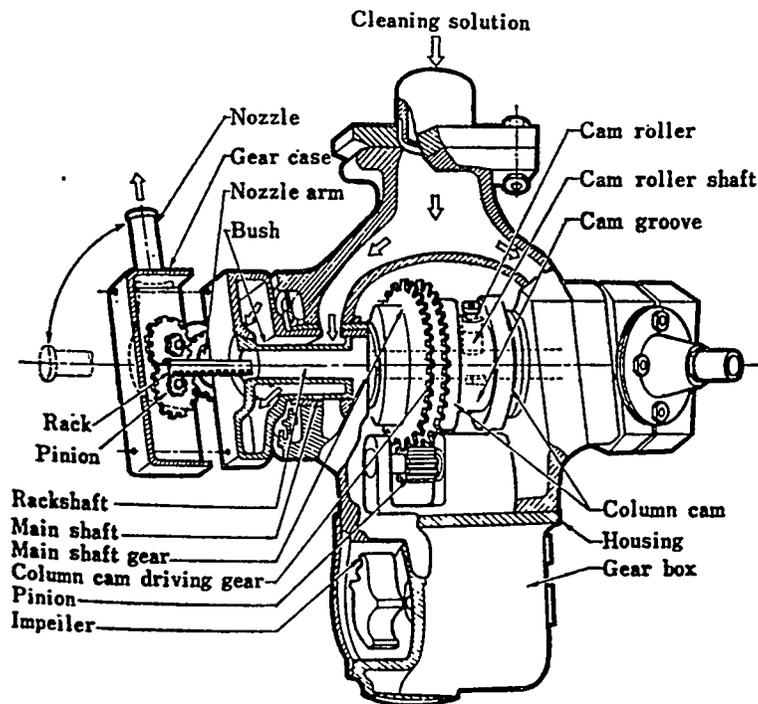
Cutaway view of rotating jet cleaner.³⁶
